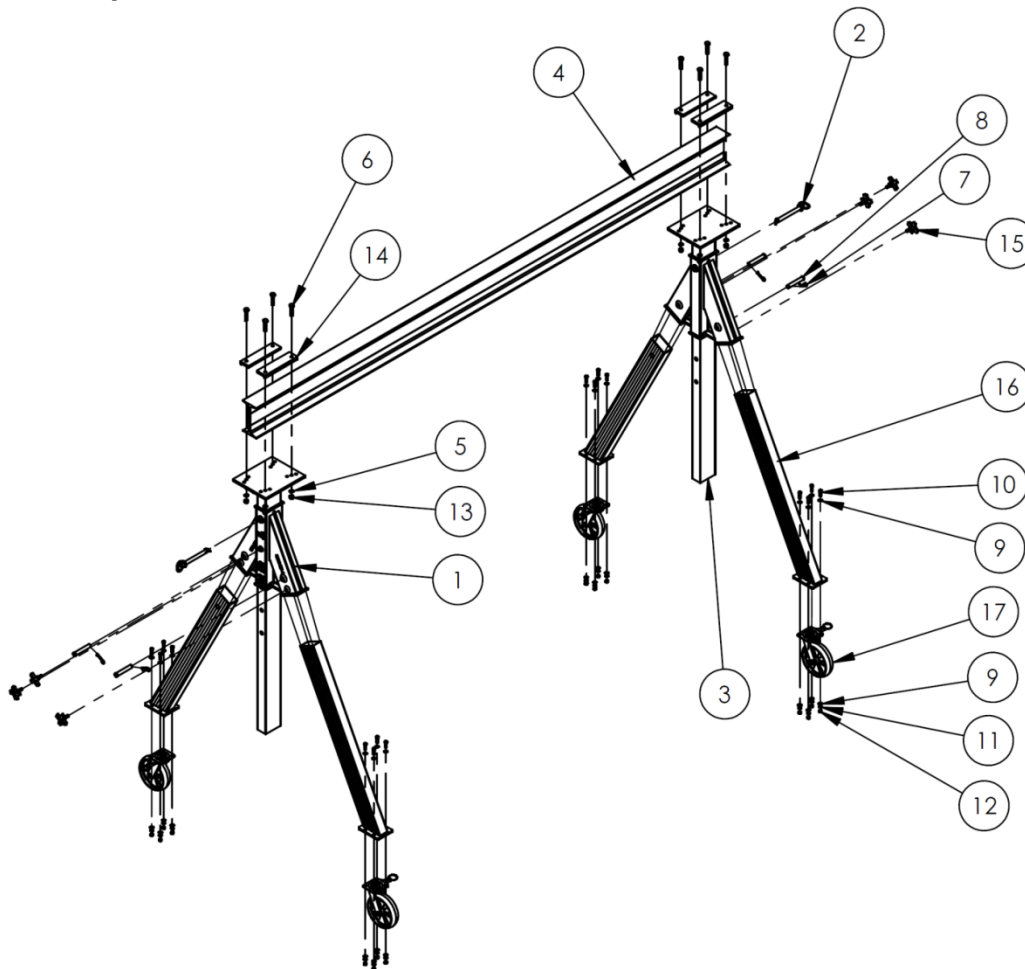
Exploded view of models AHA-4-8-8, AHA-4-8-10, & AHA-4-8-12
